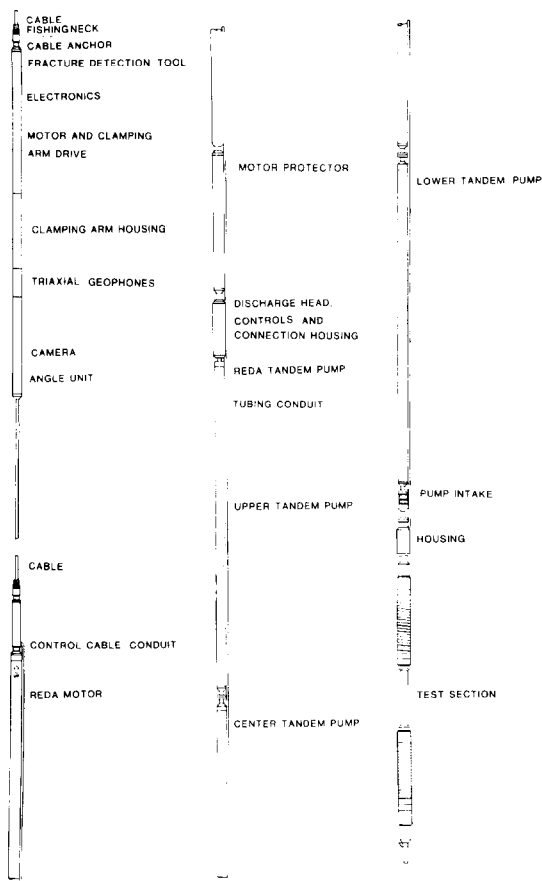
Tool No. 1 - Modified oil field submersible pump.
